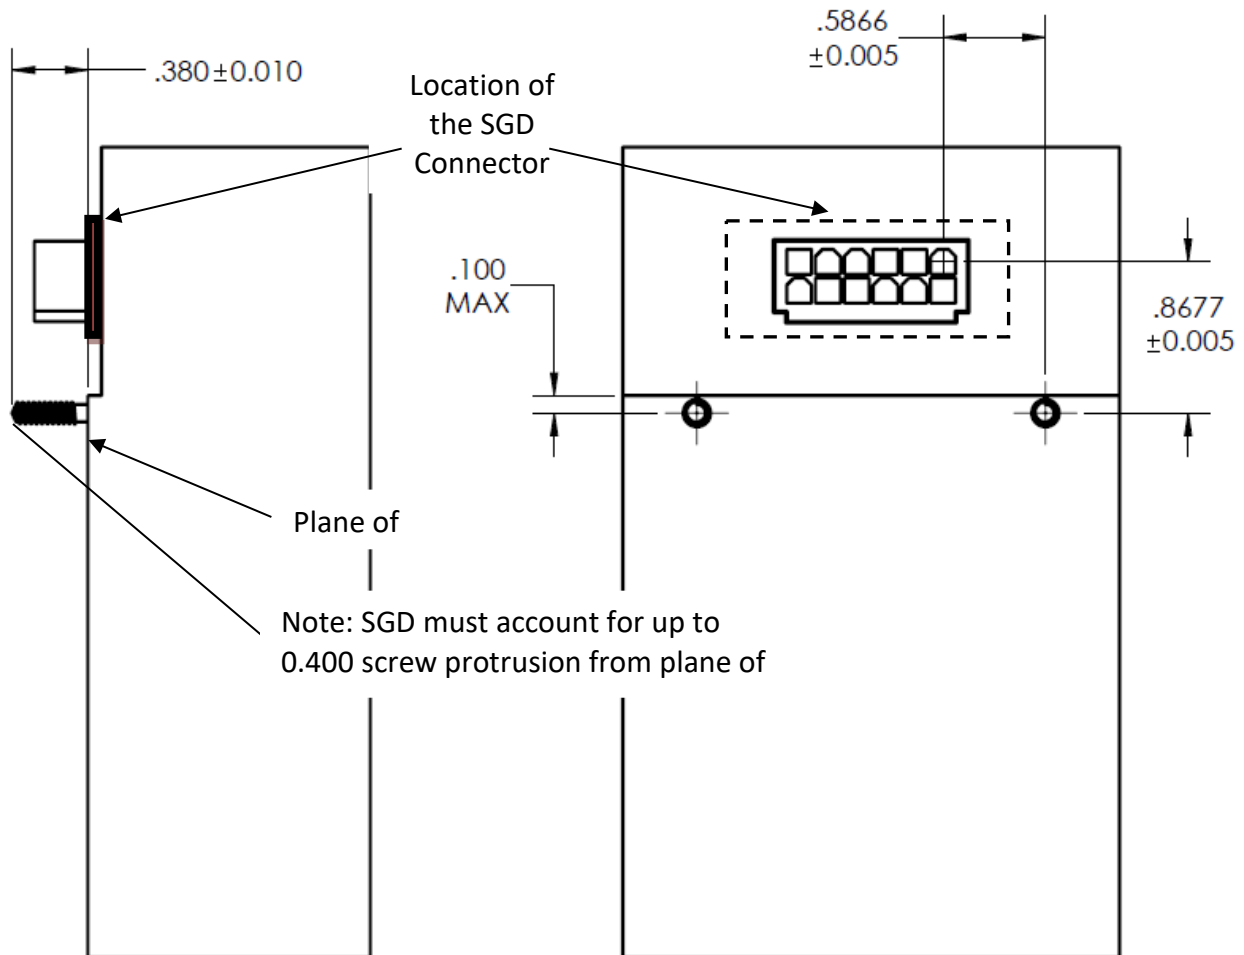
Left side and bottom view of maximum UCM dimensions
